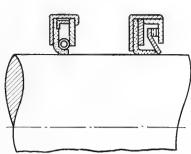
Left, Chicago Rawhide Company seal. Right, Gits Brothers Manufacturing Company seal. They can be used for sealing in either direction, the spring maintaining pressure between the leather and the shaft.
